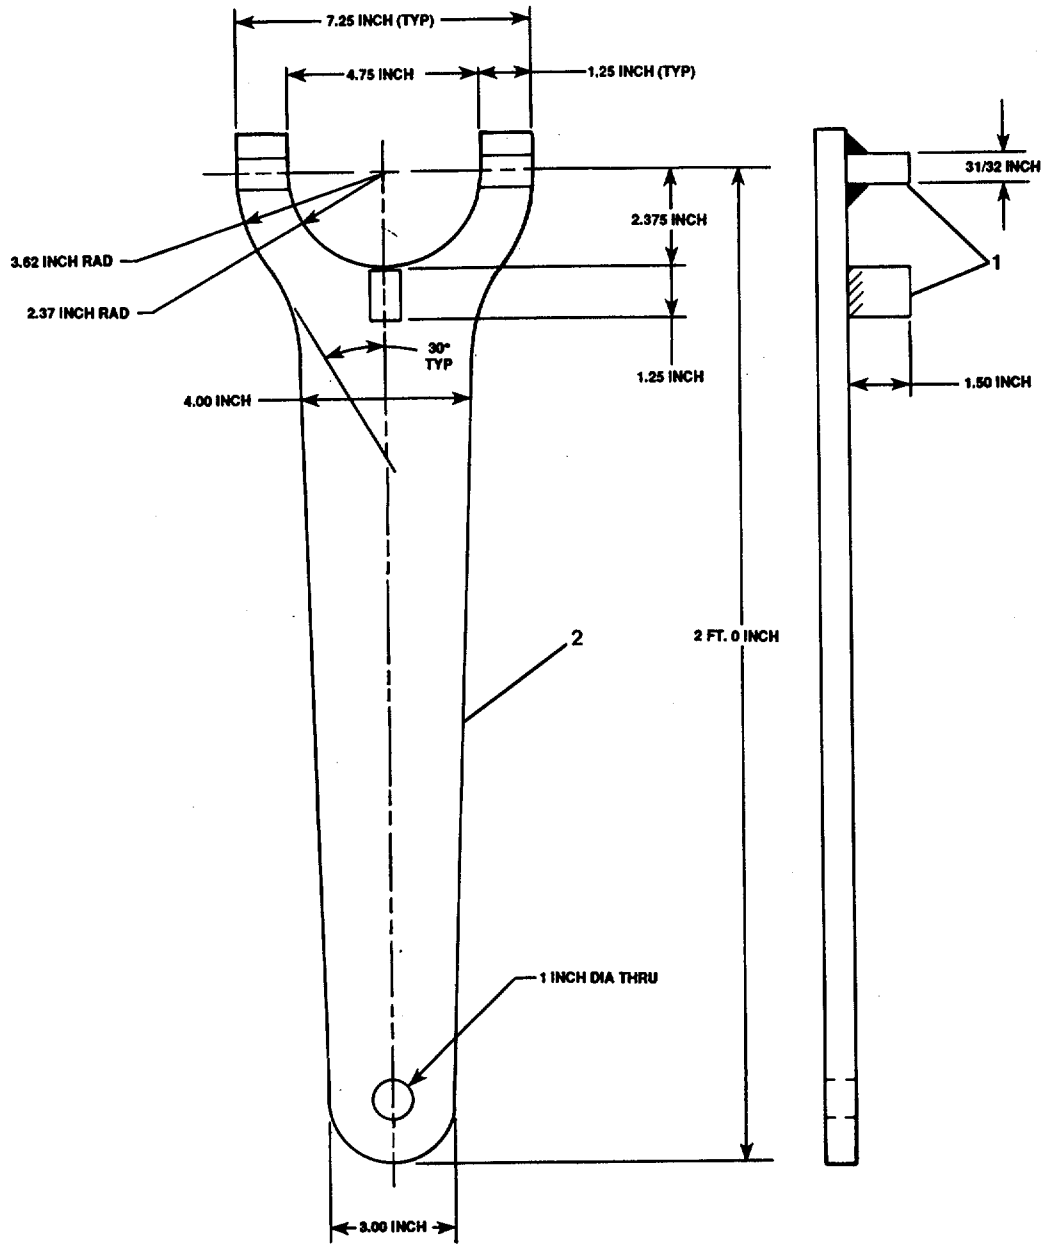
Propeller Shaft Assembly (Sheet 2 of 5).
